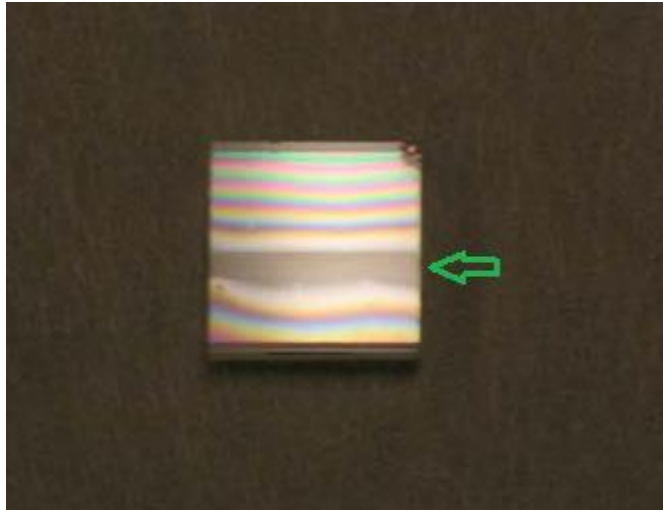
Camera top view of fused silica substrates after femtosecond laser multi line welding. Sample size is 10mm by 10mm. The jointed area is marked by green arrow. The figure is adapted from [11].
